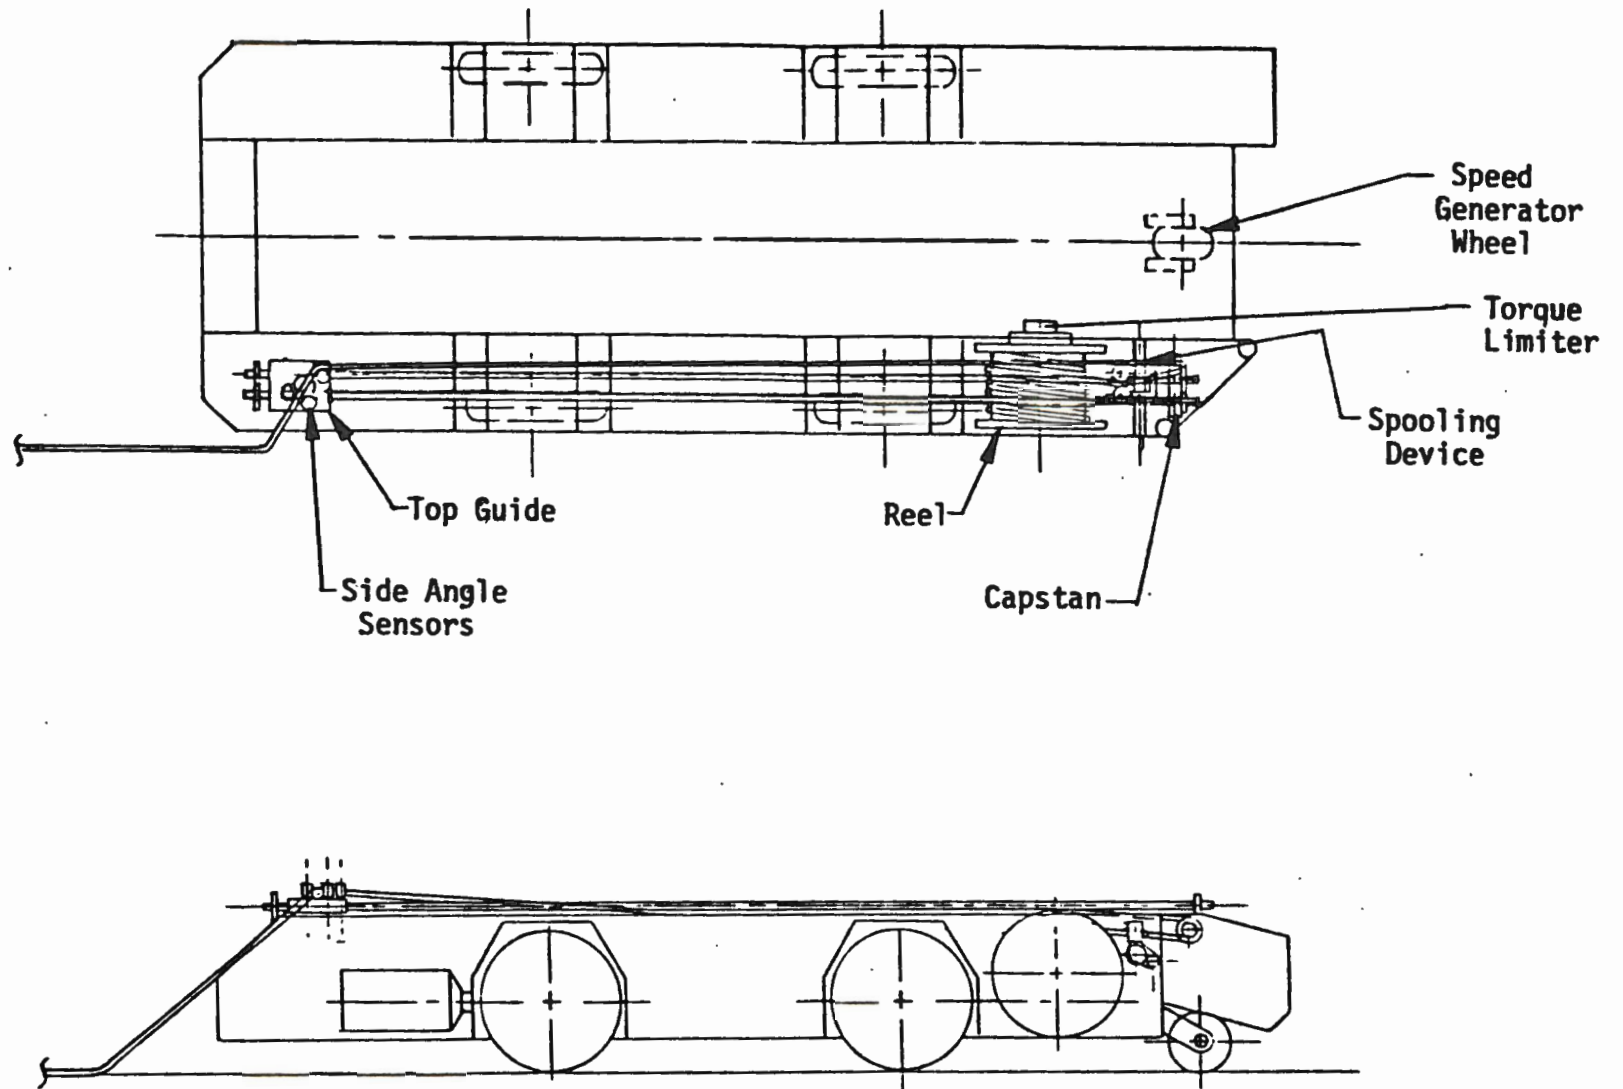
SYSTEM CONCEPT NO. 1 - CAPSTAN CABLE DRIVE FROM A TRACTIVE WHEEL
